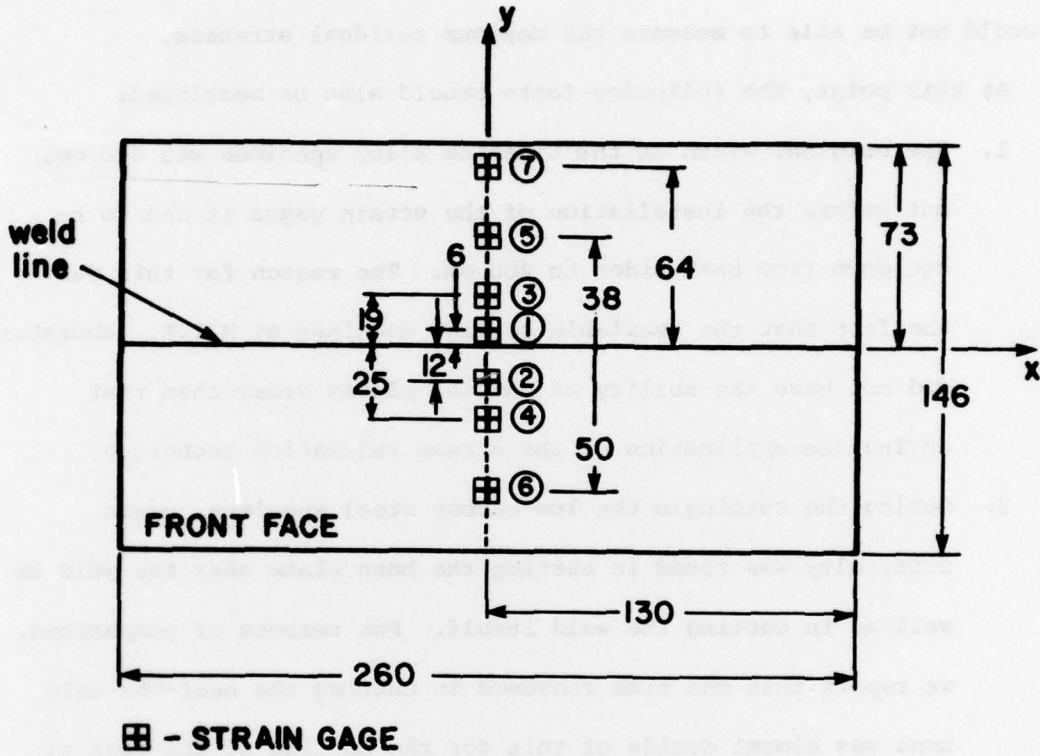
AISI 4130 Specimen - Dimension and Strain - gages Position
